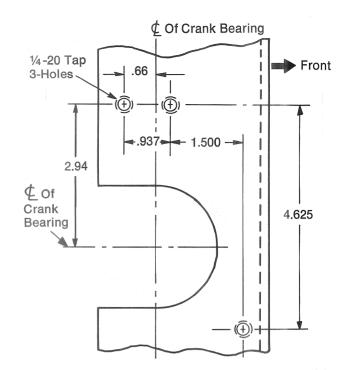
Left side view of center channel — drilling plan for programmer mounting bracket.
